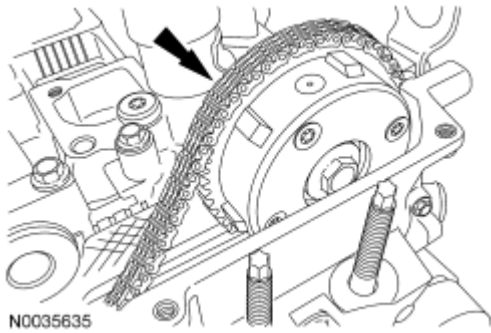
Locating Timing Chain On Intake Camshaft Drive Gear
